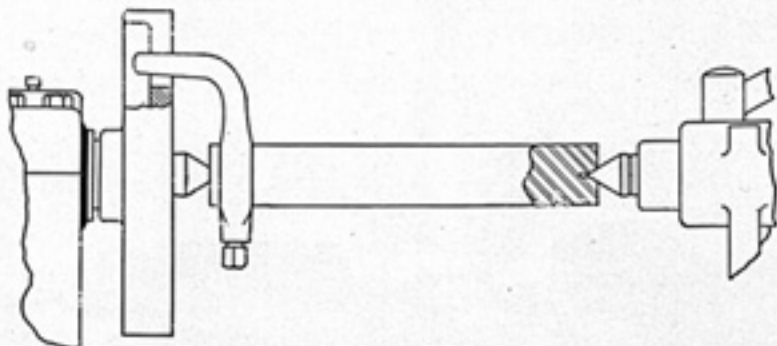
Lathe dog should be tight when work is mounted between the lathe centers for cutting screw threads.
